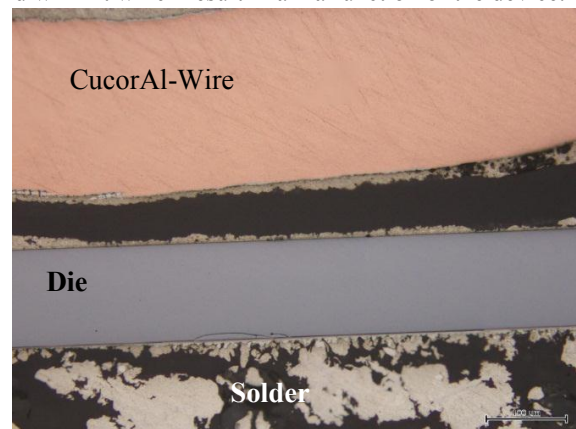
Optical image of the crack using Aluminum wire with solder die attach
